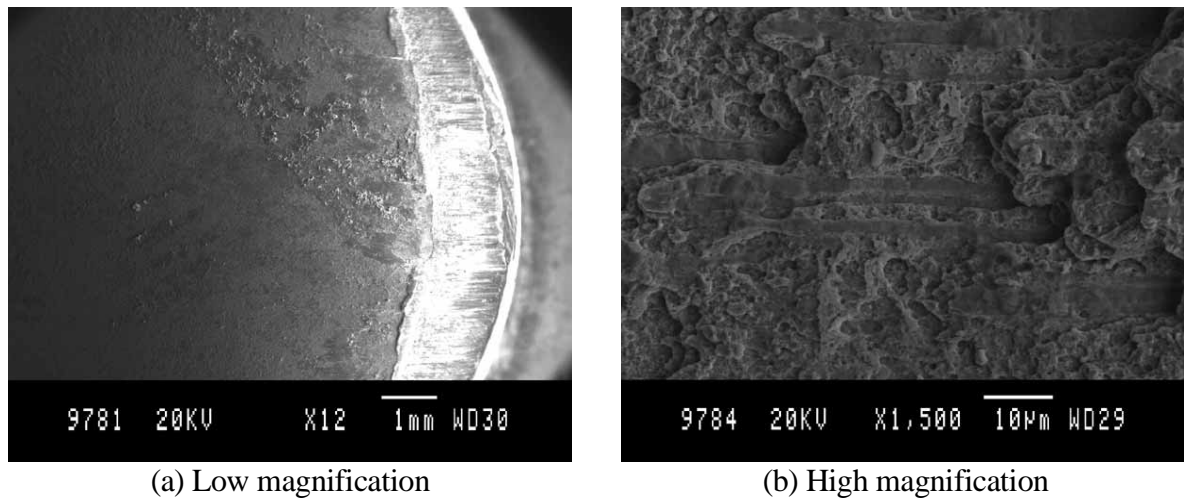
SEM fractographs of bolt of about 16 mm diameter
